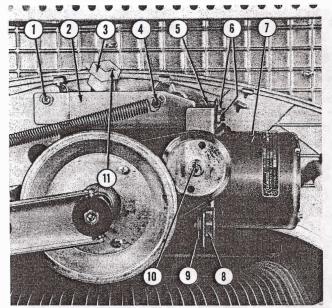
TURNTABLE MOTOR MOUNTING AND BELT ADJUSTMENT
